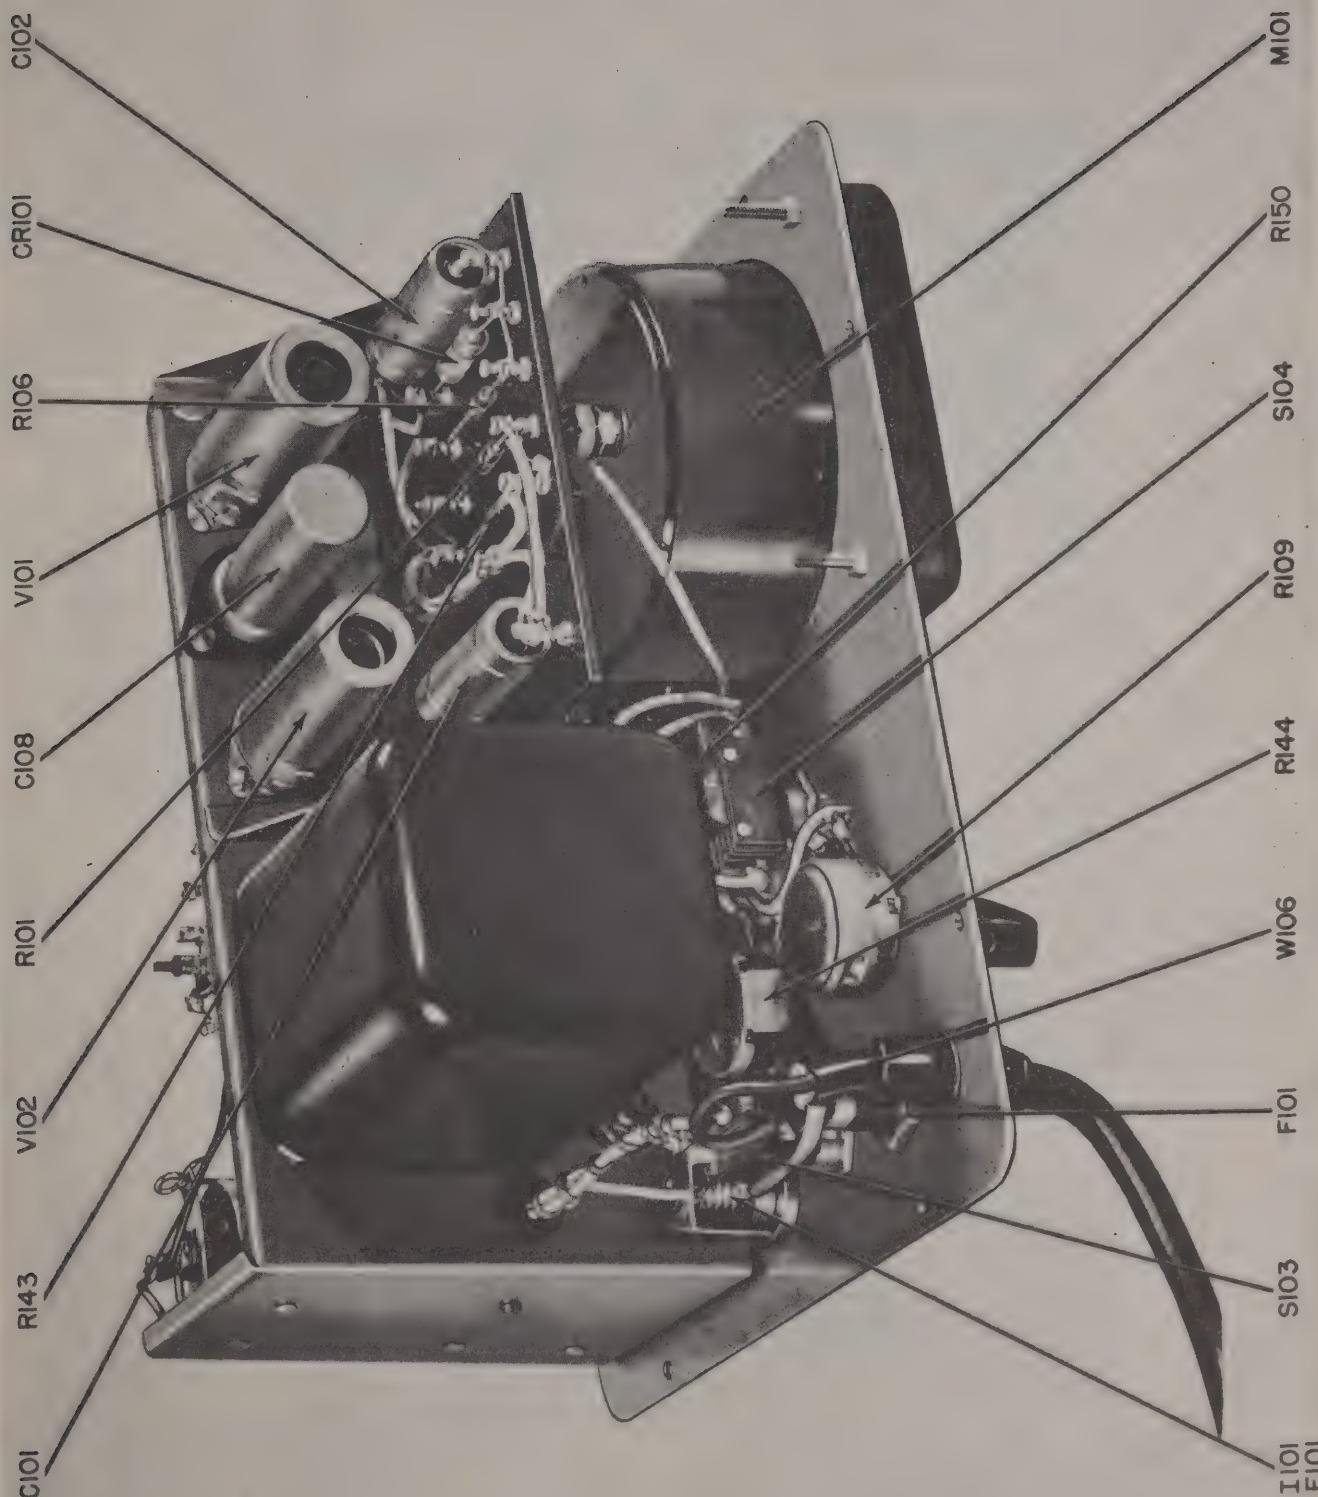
Multimeter ME-25A/U, Case Removed, Top View
